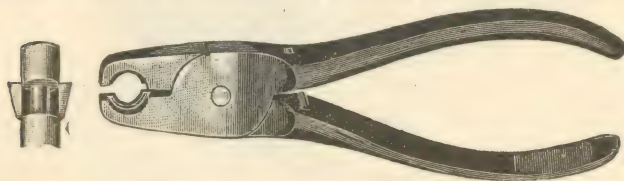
TOOL FOR SPLIT CONICAL KEEPERS
